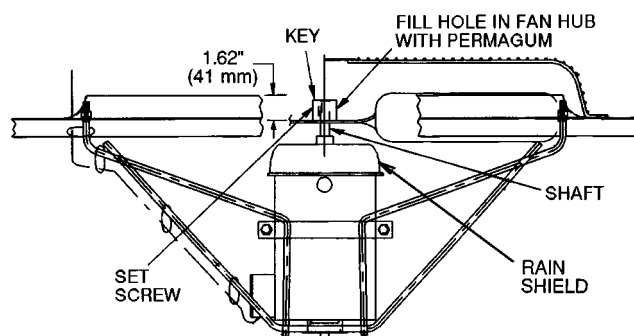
Location of Propeller on Motor Shaft from Outside of Orifice Ring, 576B
